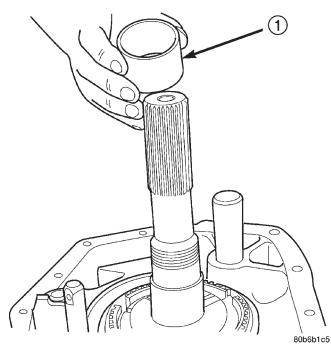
REVERSE BEARING SLEEVE 1 - REVERSE GEAR BEARING SLEEVE
